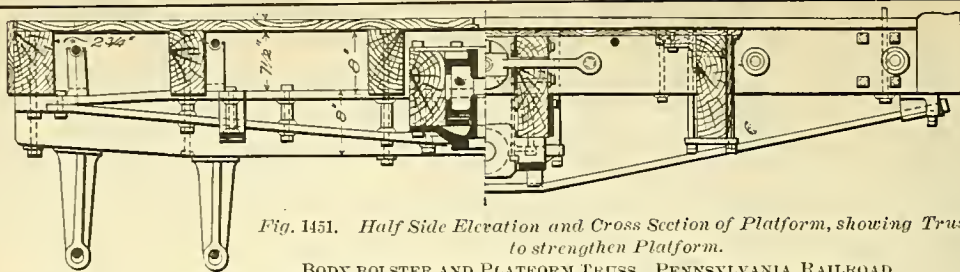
Half Side Elevation and Cross Section of Platform, showing Truss to strengthen Platform.
